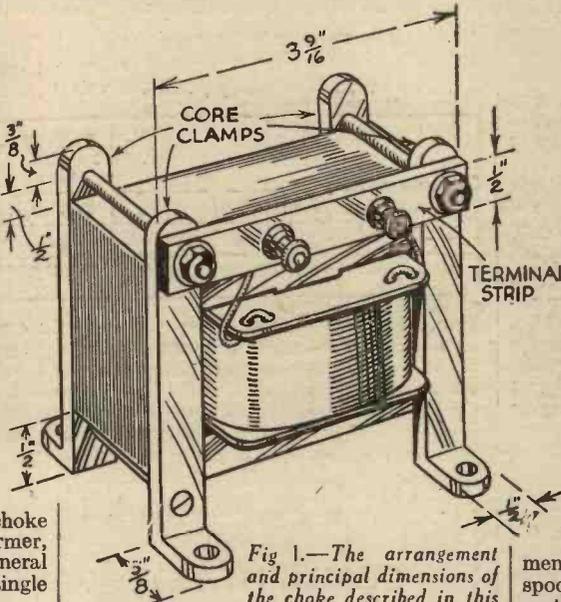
The arrangement and principal dimensions of the choke described in this article.
